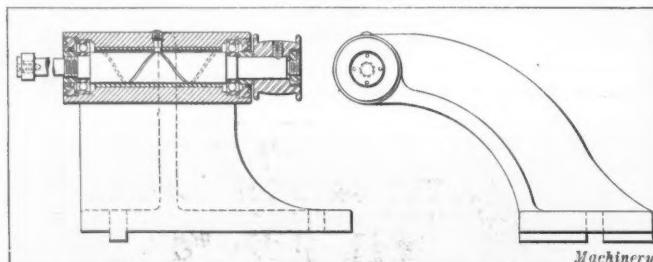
Internal Grinding Attachment for Use on Machine shown in Fig. 1
